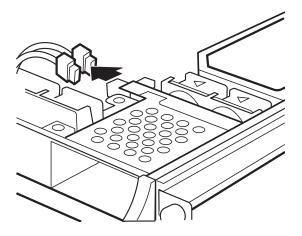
Disconnecting Cables From the SAS IF Assembly
